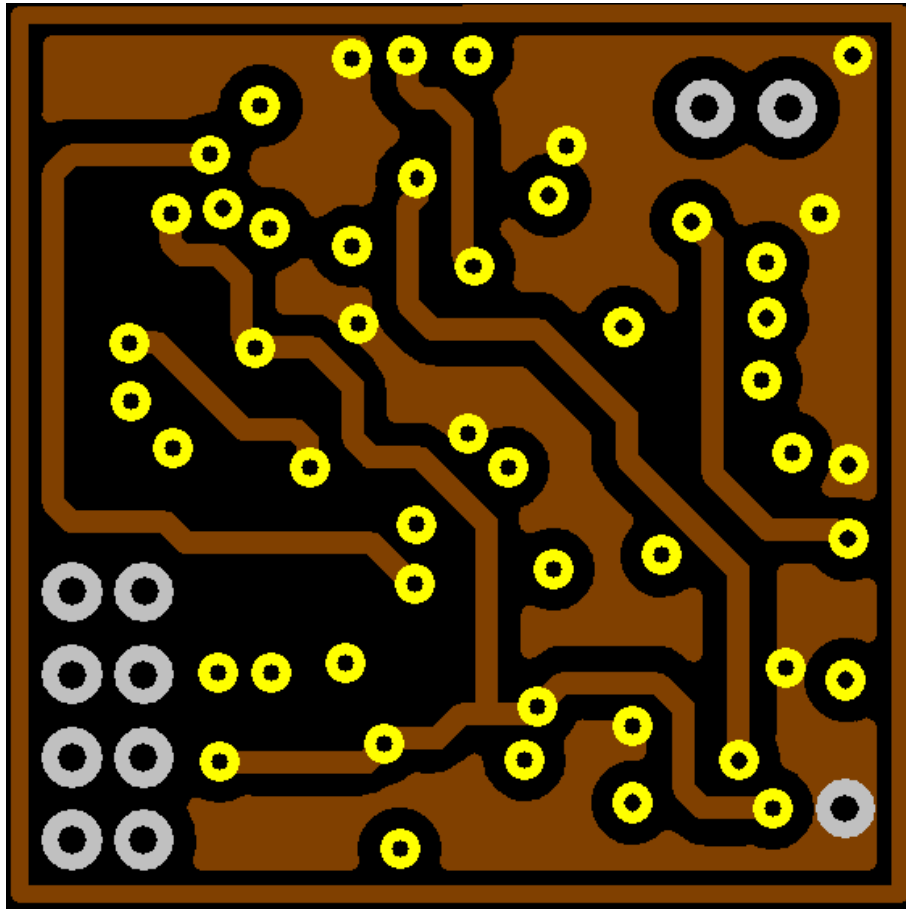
Third Layer PCB Layout of four channeled telemetry unit of the dimension 10 mm x 10 mm
